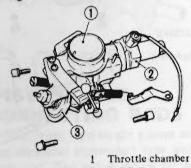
Removing E.G.R. control valve and B.P.T. valve
